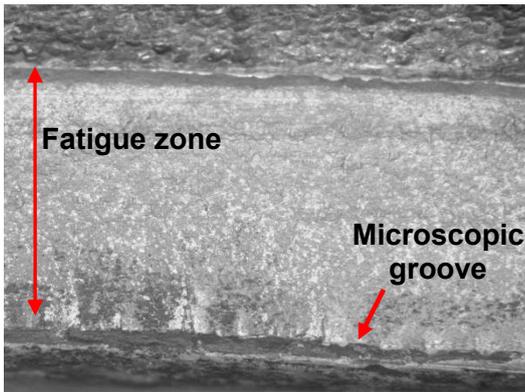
Fracture initiation region revealing multiple fatigue crack initiation
